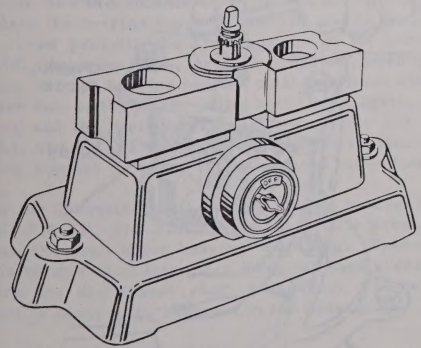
Magnetizing Standard Two-pole Rotor with Bar Magnets. To magnetize standard two-pole rotor with block magnets, use same setup but reverse charging blocks.
